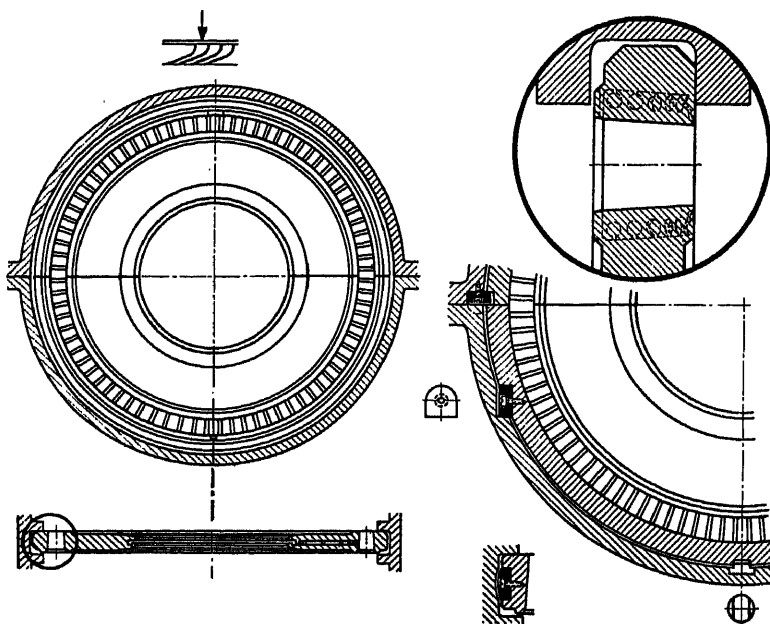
A.E.G., split diaphragm with cast-in nozzle plates
